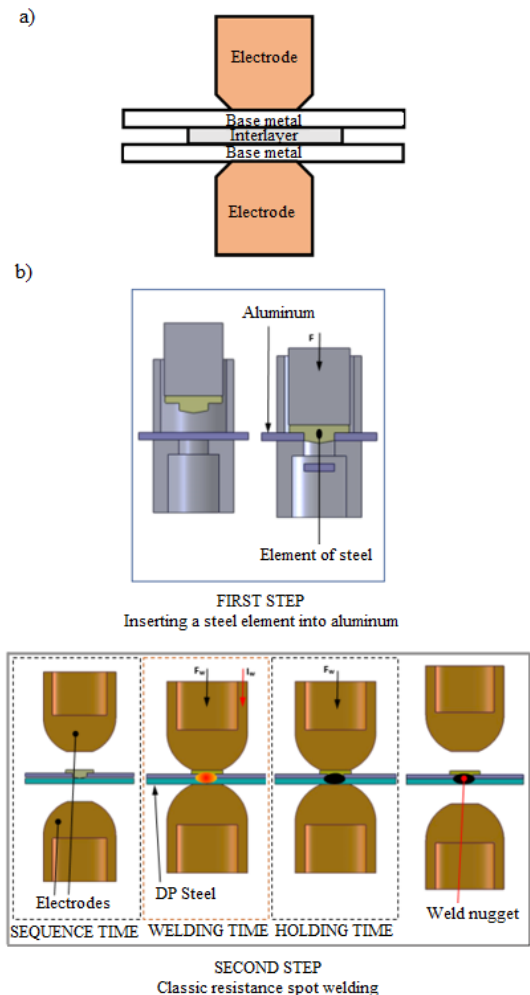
Schematic illustration of a) interlayer-assisted RSW (IA-RSW) [41] and b) Resistance Element Welding (REW) [30]
